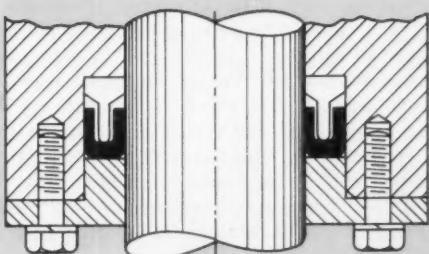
Bolted U-cup gland. Nose of support ring projecting inside U-cup is rounded to avoid cutting packing.
